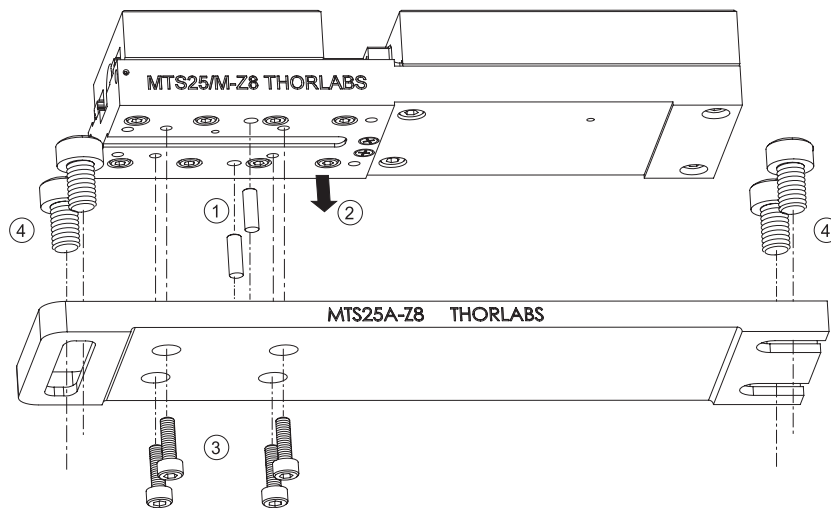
Fitting the MTS25A-Z8 Base Plate
